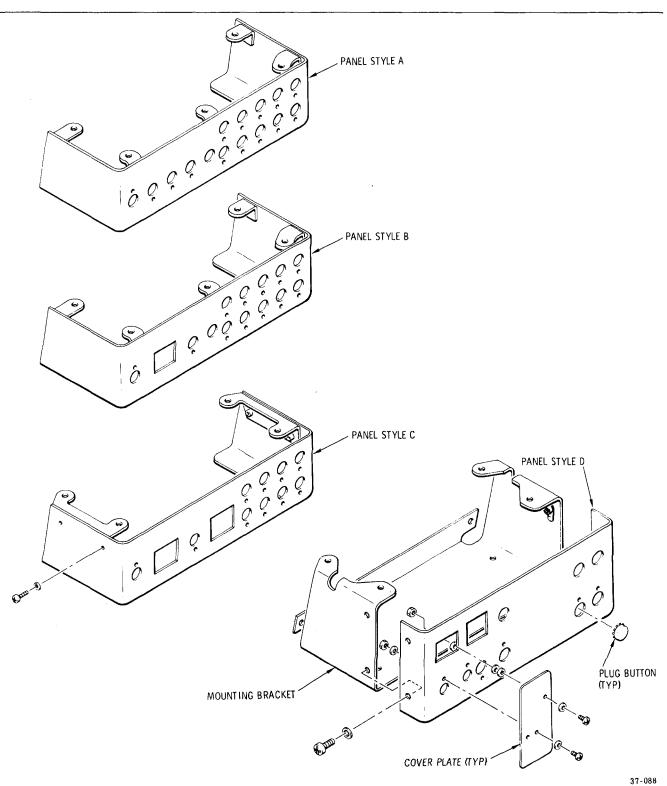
Auxiliary electrical panels for instrument panel type A
